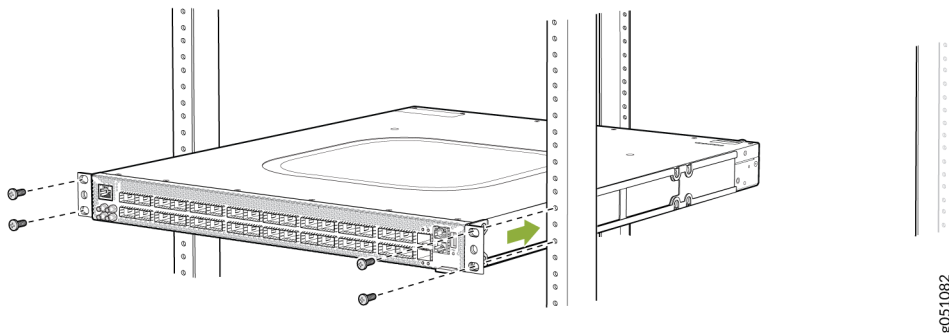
Attaching Mounting Rails to the QFX5220-32CD
